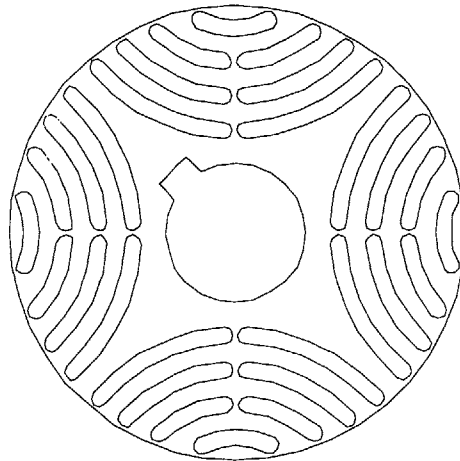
Rotor drawing for four-layer experimental IPM machine.
